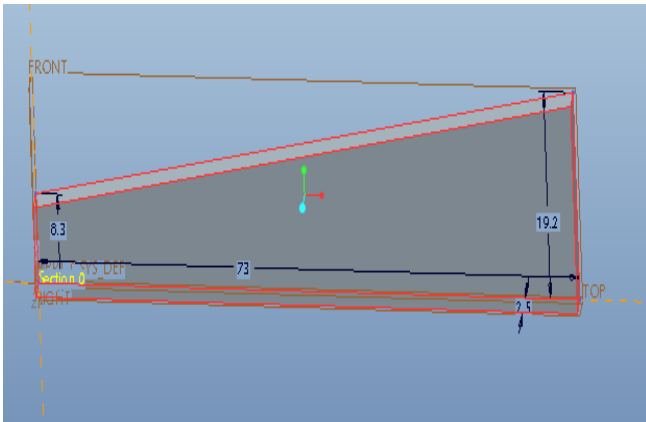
Dimensions of Honda CB Shine fin<sup>[11]</sup>
